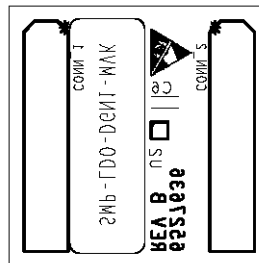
SMP-TPS7A1601-MVK Board Silkscreen – Bottom Side
